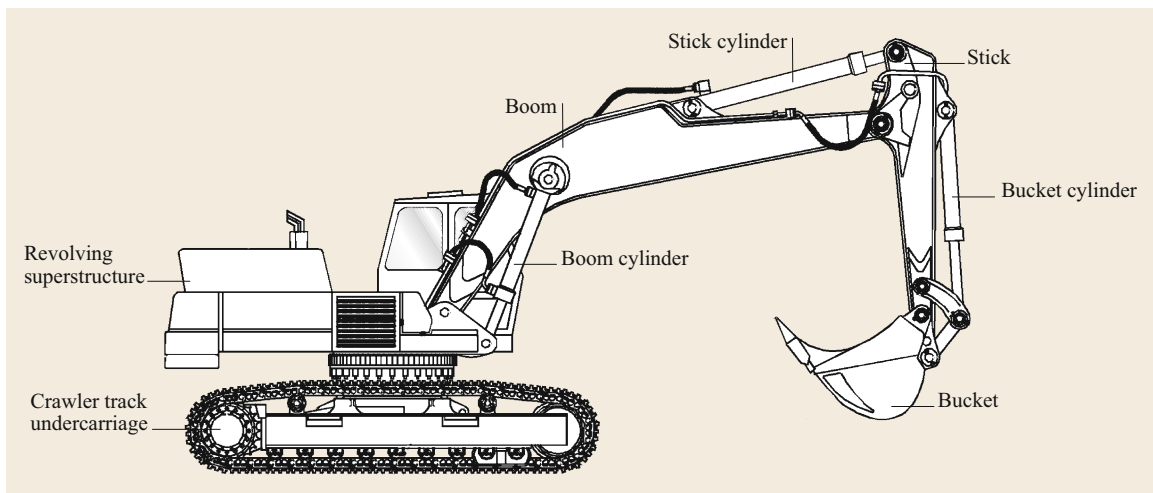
Basic construction of a hydraulic excavator (after [20.246])
